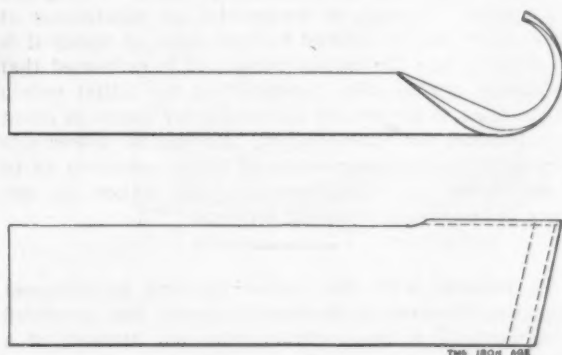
The Special Form of Tool Used in the Cutter Heads.
